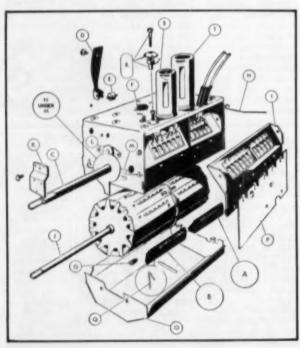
Exploded view of the Standard Coil tuner. Most of the mechanical parts shown labeled are available in the complete parts kit for replacement purposes.
